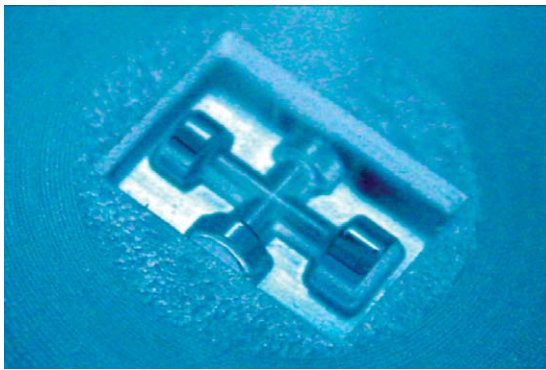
Ultra-precision (UP) machined free-form surface in polycarbonate.
